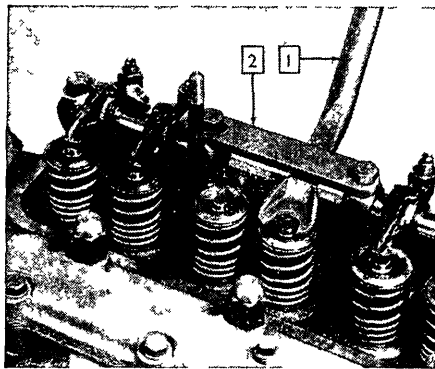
Removing valve spring on overhead valve engines using pry bar (1) and brace (2). 1935-52
